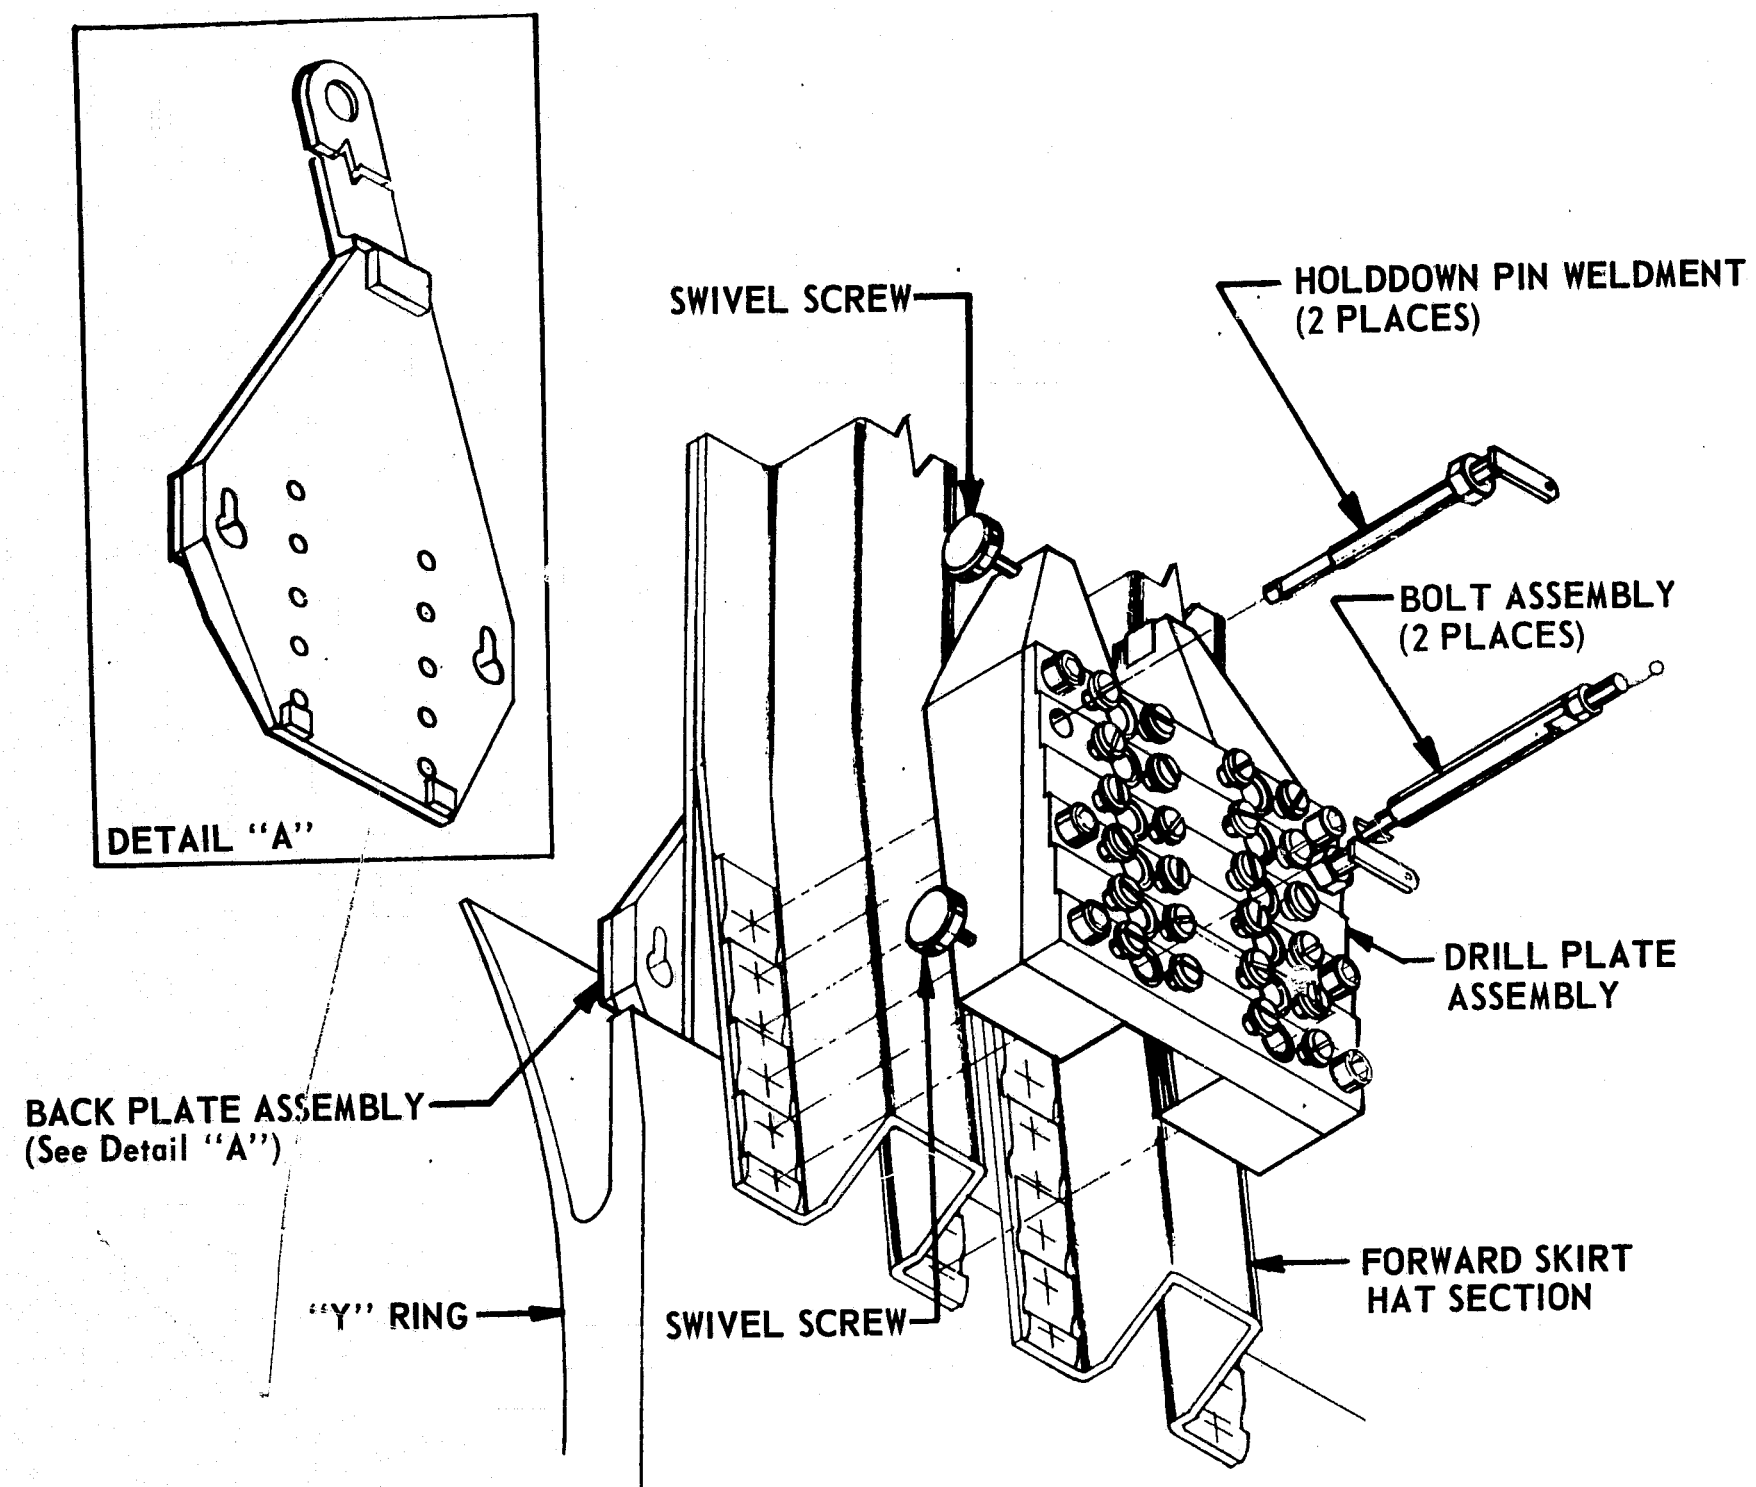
FORWARD SKIRT DRILL JIG
